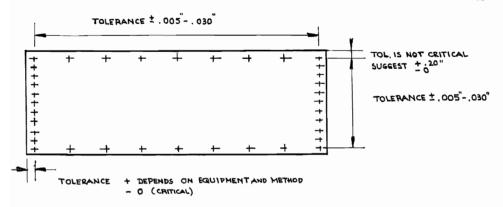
Grain Bin Side Sheet - Tolerances on Hole Location
